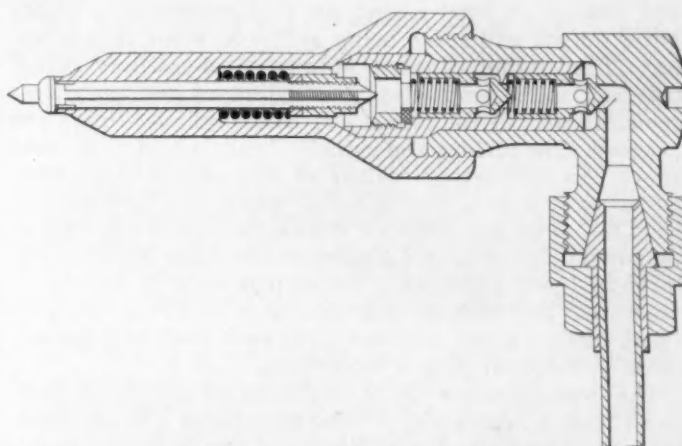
INJECTOR USED ON THE PEUGEOT HEAVY-OIL ENGINE
